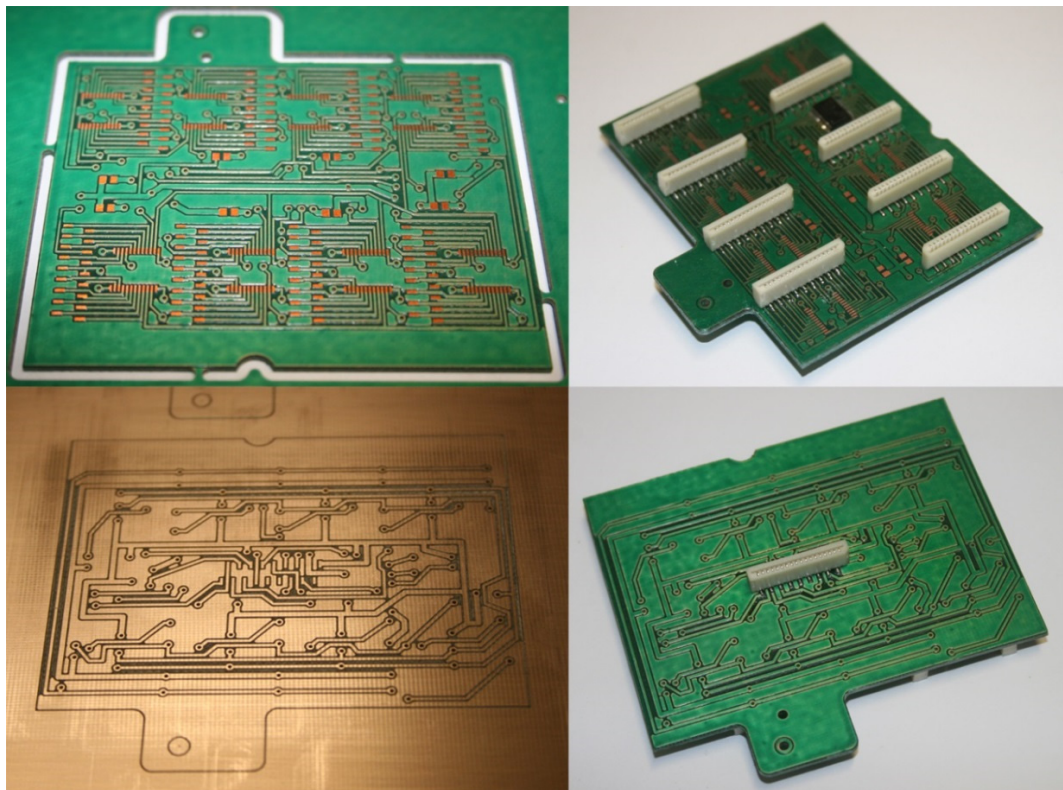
Segment Board prototypes. The Segment Board design was prototyped using rapid prototyping tools to verify the electrical layout and check for physical fit into the Wheel Segment.
